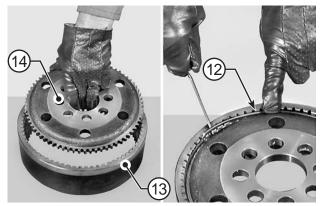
Fit the flange (14) in the ring gear (13) and lock into position with snap ring (12).
